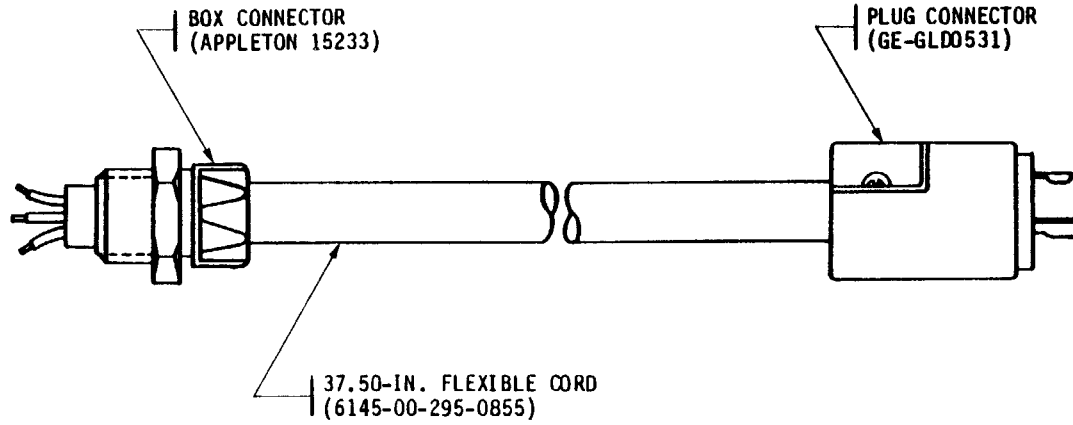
Power cable assembly, 11021165, unit 2, M35A2.
